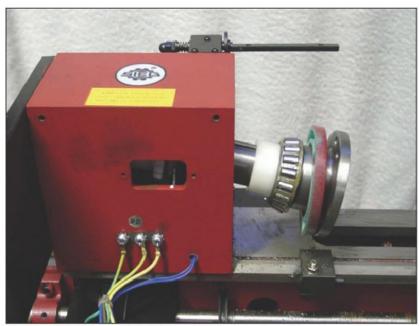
Spindle assembly is fed thought the spacer, disc and gear.
